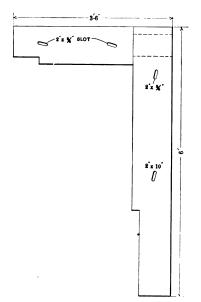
The Two Pieces of 2 x 8 In. Stock Mortised Together.
